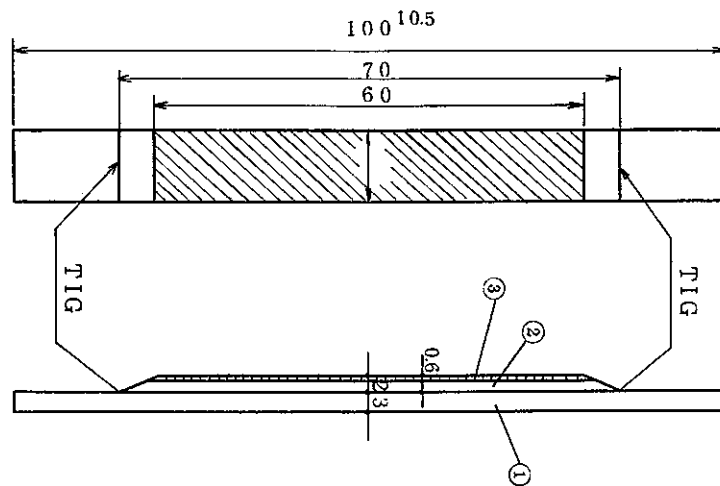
View of irradiated pad oblong shaped specimens(Colmonoy No.6).
